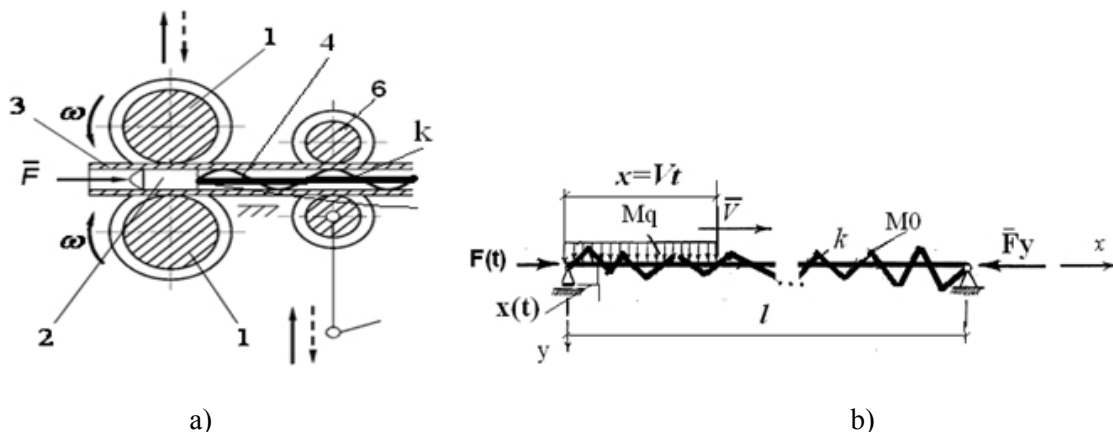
a) Mandrel holding mechanism of automatic mill TPA; b) design scheme of the mechanical system
